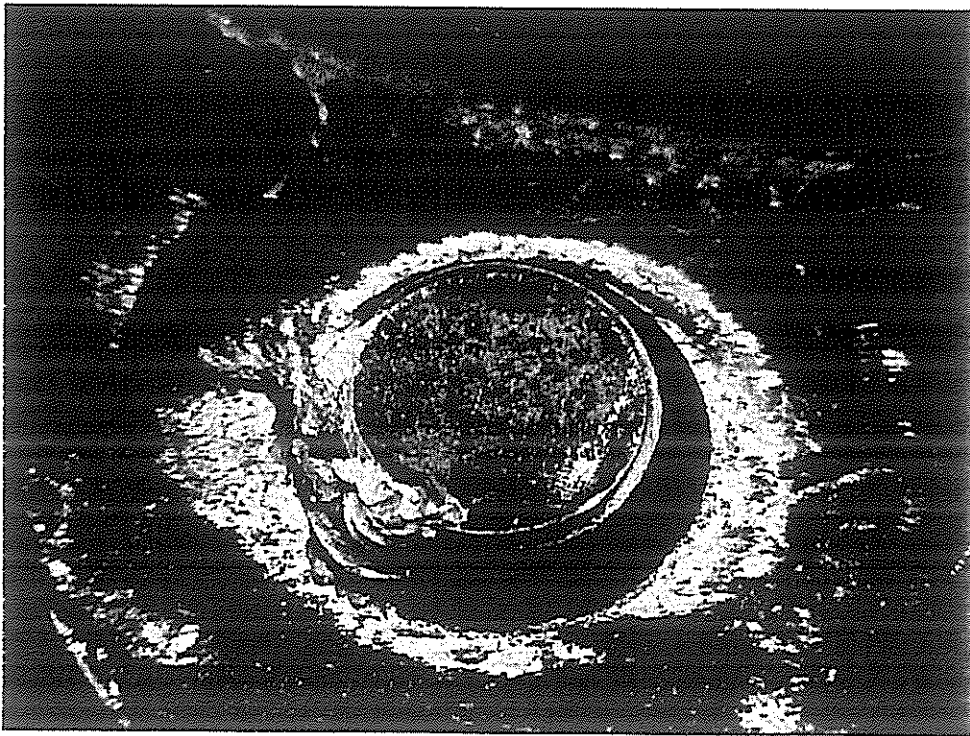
Showing the location of fracture on bolt 7 at the thread runout – edges of the bolt and fracture were damaged by looseness of the wheel
